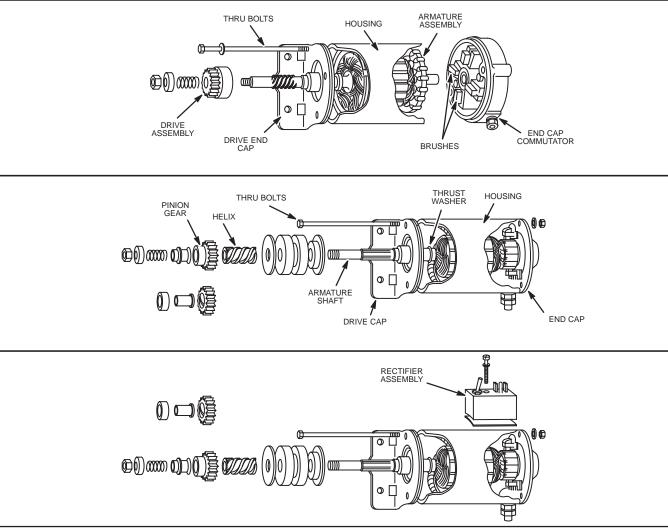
STARTER MOTORS (EXPLODED VIEWS)
